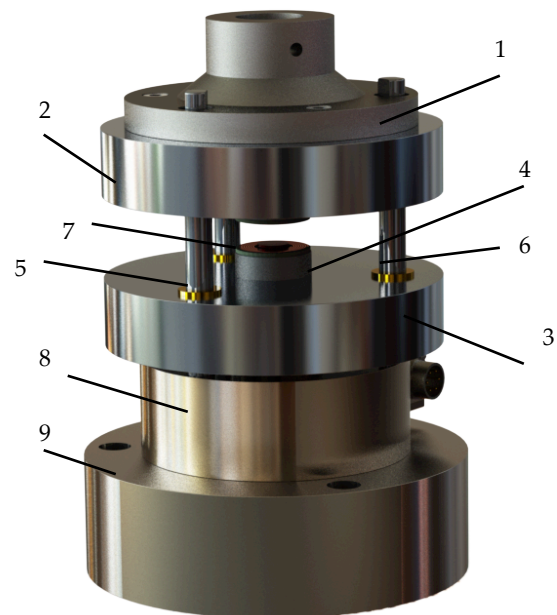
Compression tool, modelled in Solidworks. 1 – Connector; 2 – Top Platen Holder; 3 – Bottom Platen Holder; 4 – Compression Platen; 5 – Bushing; 6 – Guide Column; 7 – Displacement Sensor; 8 – Load Cell; 9 – Tool base.
